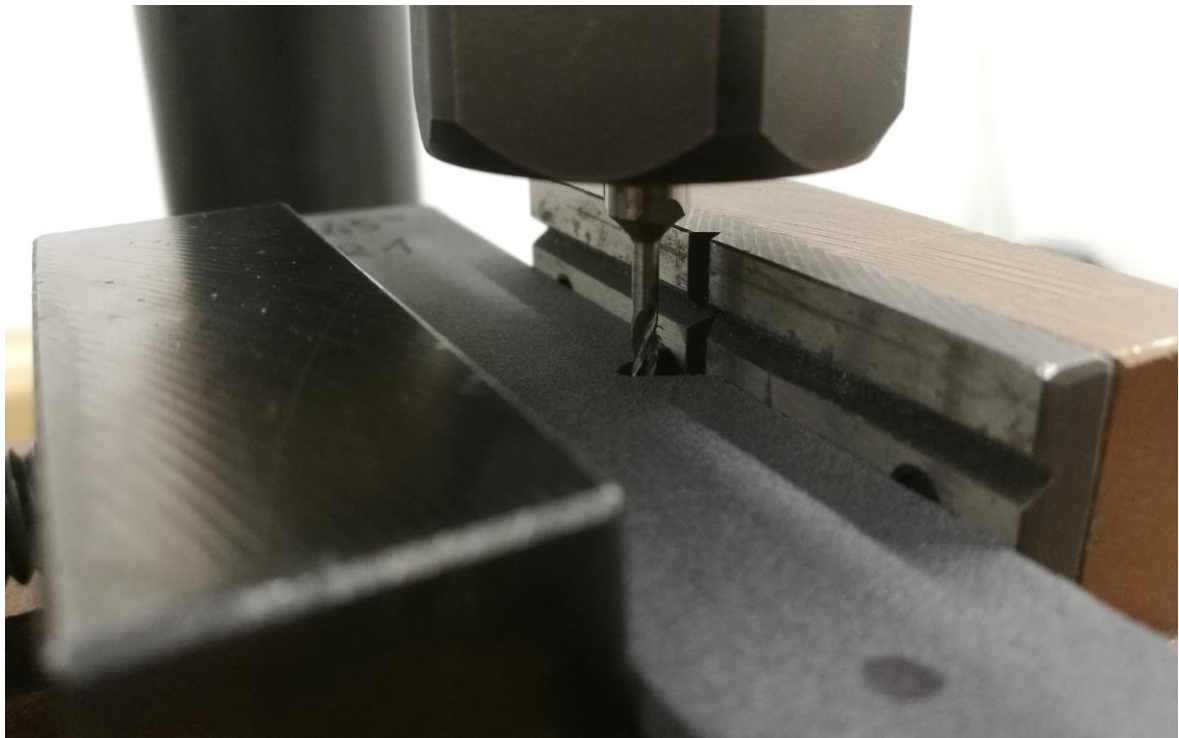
Rounded V-notch refinement with the small “Proxxon PF 360” milling machine.
